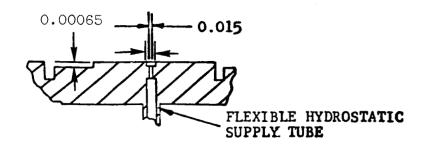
HYDRODYNAMIC THRUST BEARING. RADIAL FLOW TURBO-COMPRESSOR.
